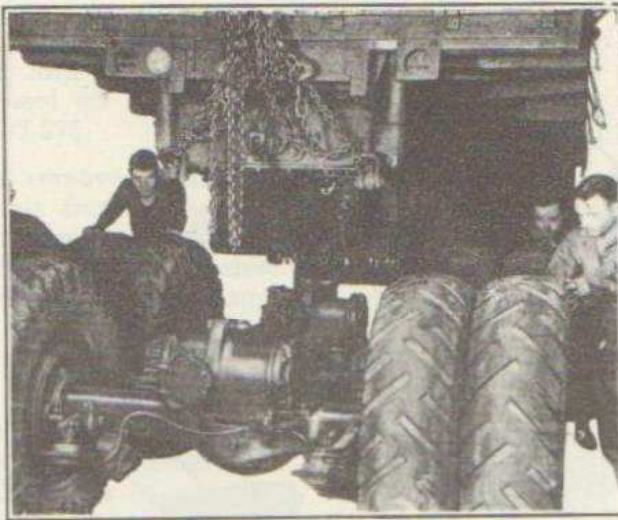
Removing Rear Axle Unit from Under the Chassis
